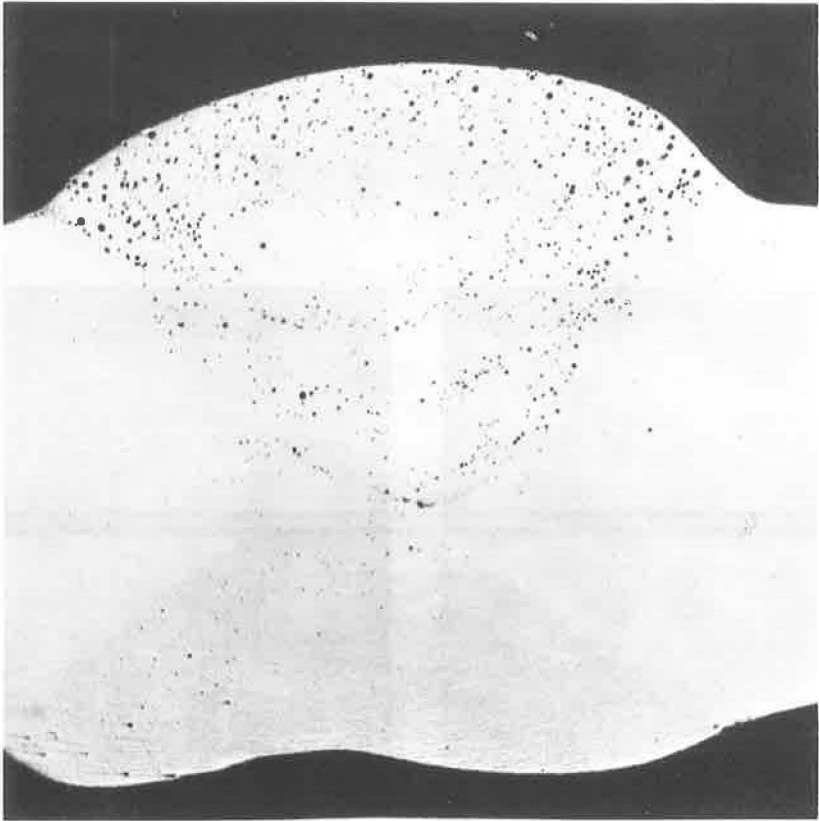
Macrograph of section through weld and crater (max. 5X, as-polished).
